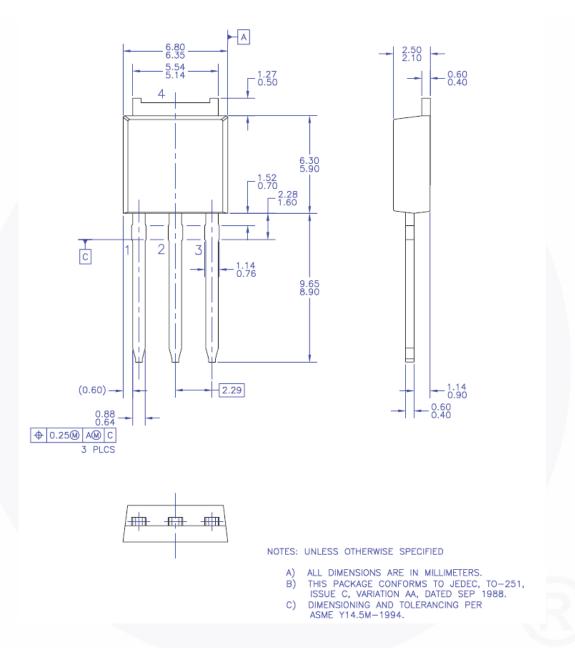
TO251 (I-PAK), Molded, 3-Lead
